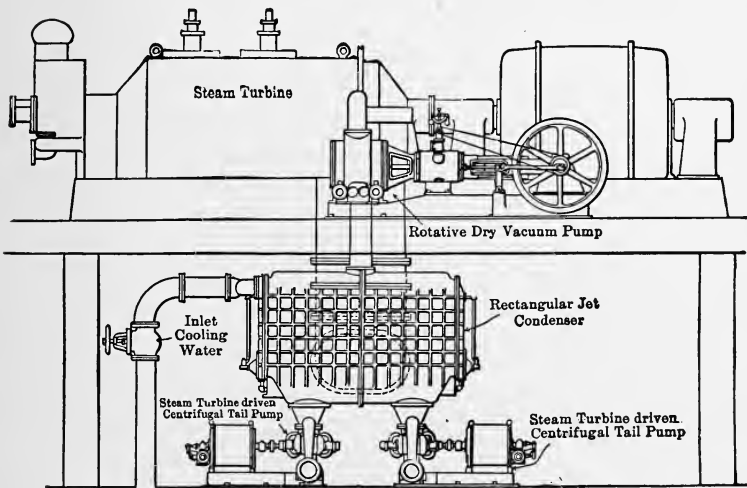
Wheeler Rectangular Jet Condenser with Centrifugal Tail Pump and Rotative Dry Vacuum Pump in Connection with a 10,000-kilowatt Steam Turbine.
